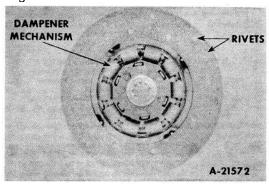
Solid Type Driven Member (Each Rivet Secures Both Facings)
